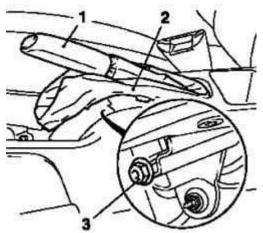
Reducing the parking brake cable: 1 - hand brake lever, 2 - cover hand brake lever, 3 - adjusting nut
